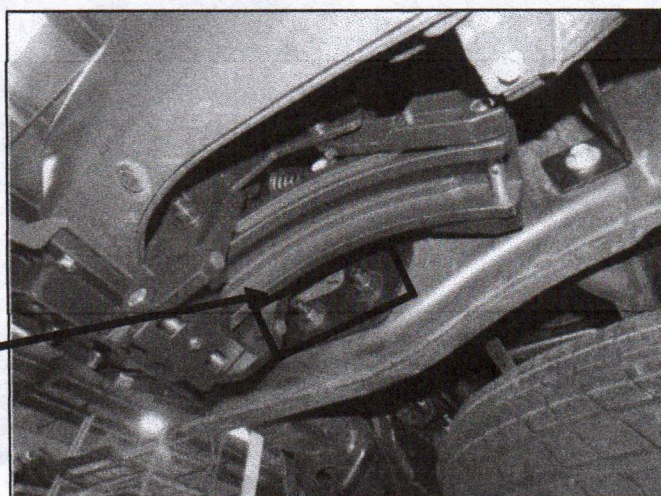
Using the rear third combo bolt, mount the support bracket to the frame mounting bracket + linkage arm assembly
